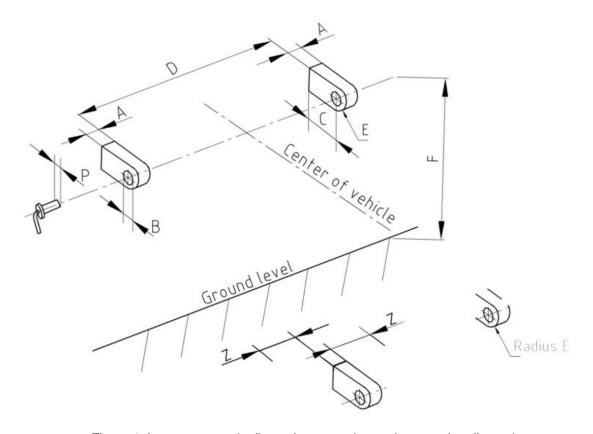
, Lugs - geometric dimensions, spacing and connecting dimensions
